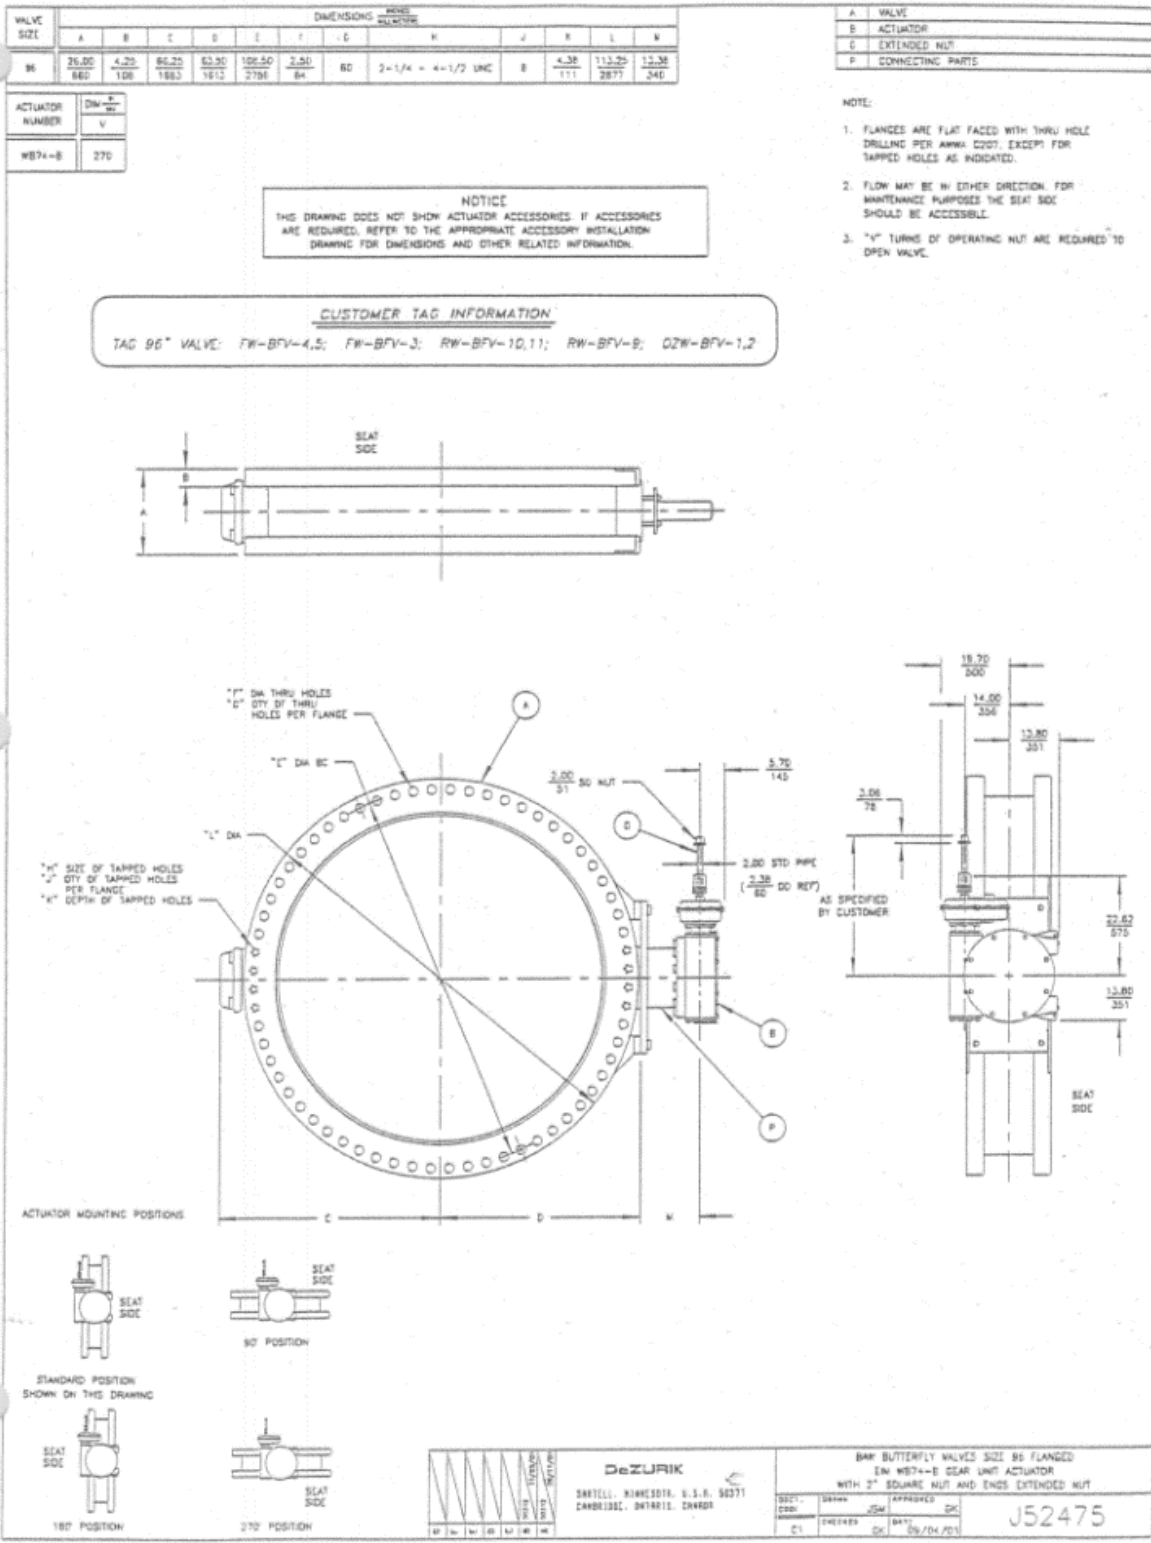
108" Dezurik AWWA Butterfly Valve Drawing
